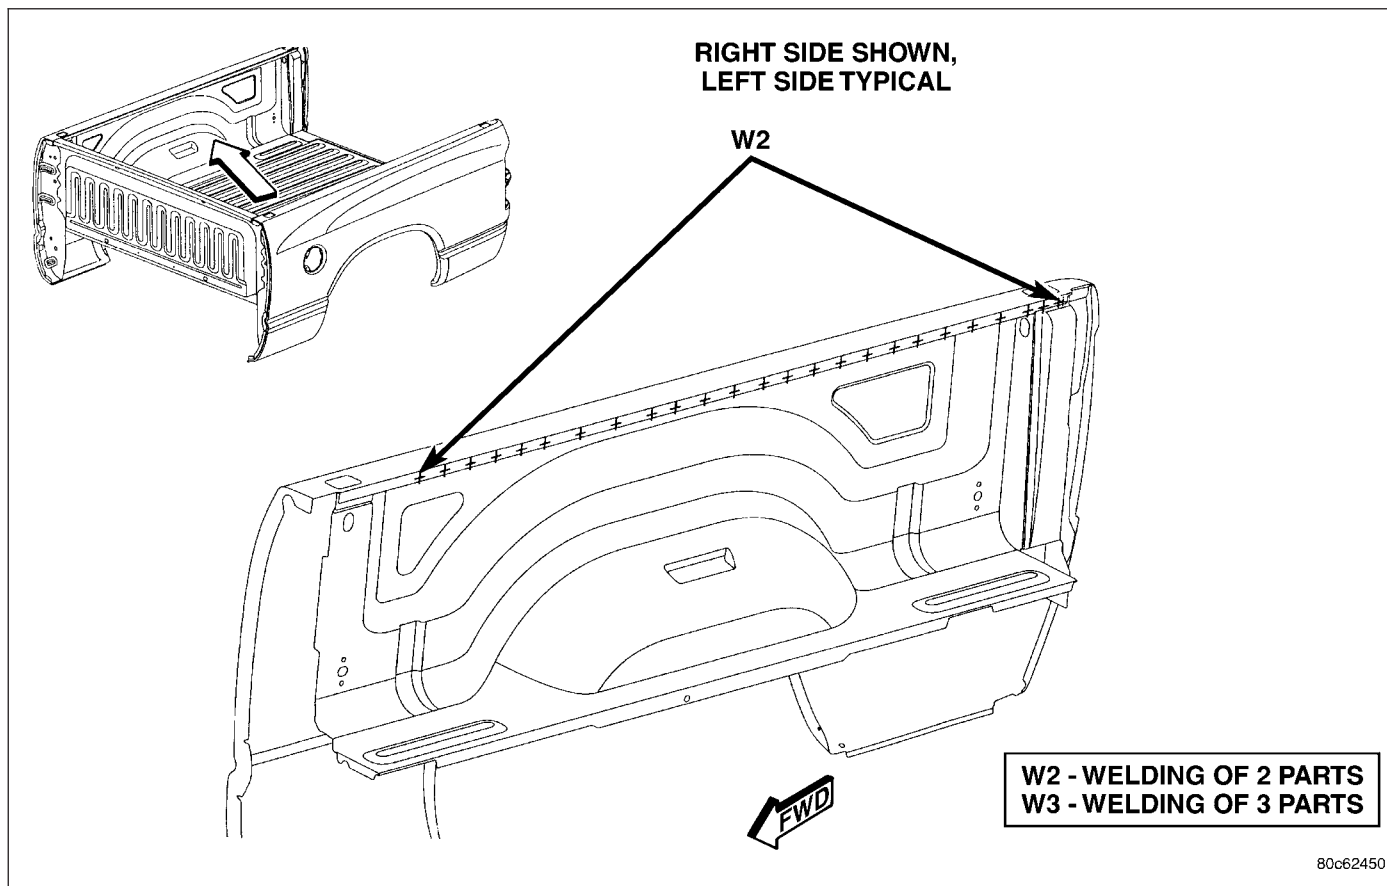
INNER BOX SIDE PANEL - SHORT CARGO BOX ONLY
